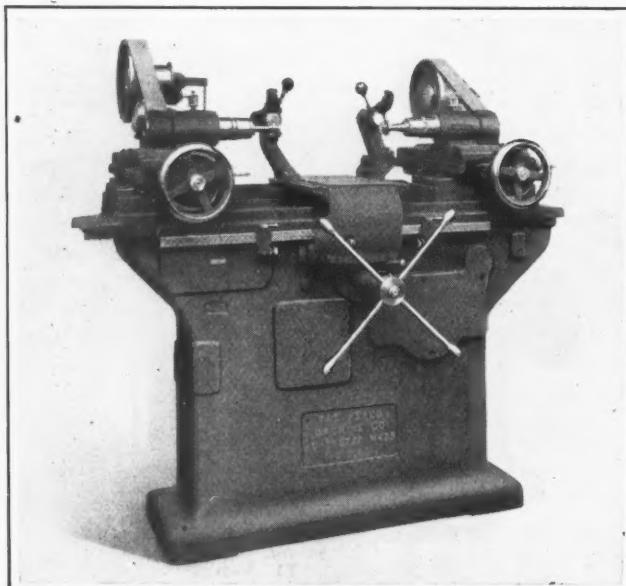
Hand-feed Type of Machine also equipped with Two Wheel-heads like the Machine in Fig. 2
